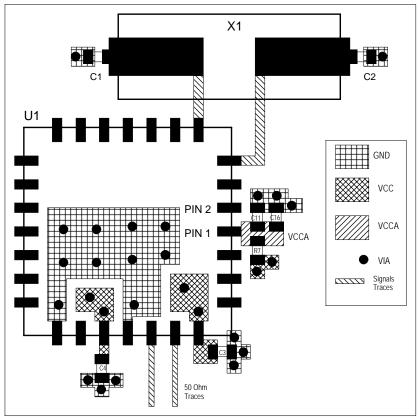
B. PCB BOARD LAYOUT FOR ICS84330-02
